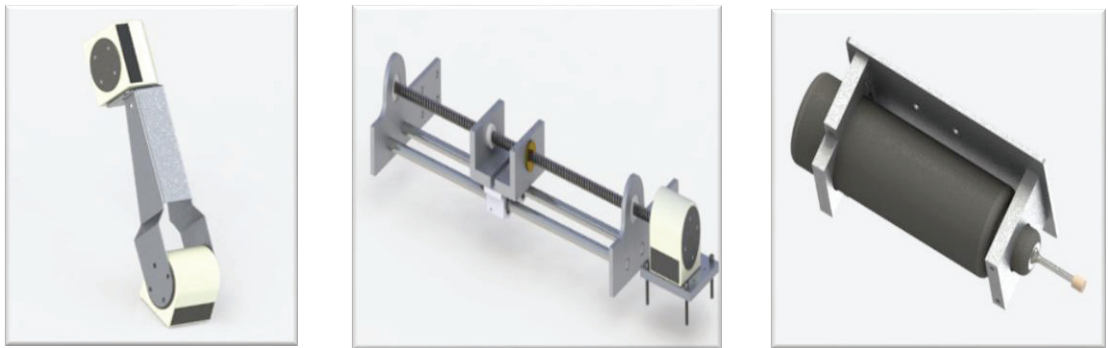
Desktop machine tool for outer diameter (left) and freeform grinding (right)
